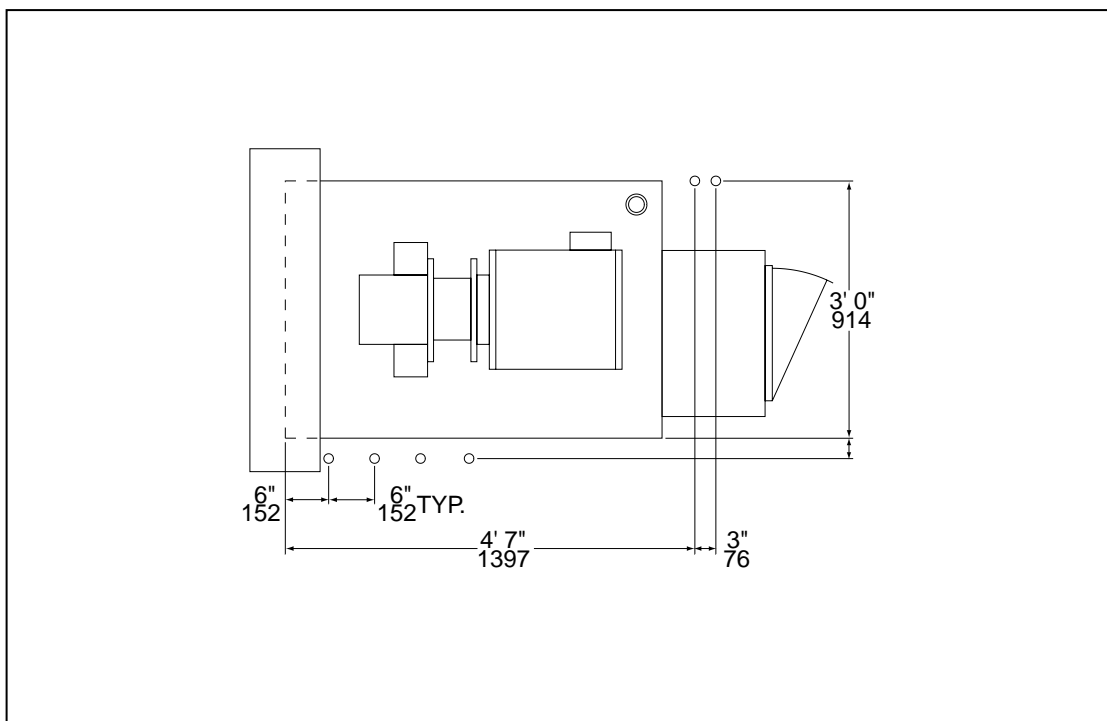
REMOTE LOCATION FOR HYDRAULIC VALVE STAND AND 20 G.P.M. POWER UNIT FOR RACK CONVEYOR (SEE INSTALLATION DRAWING FOR LOCATION).
